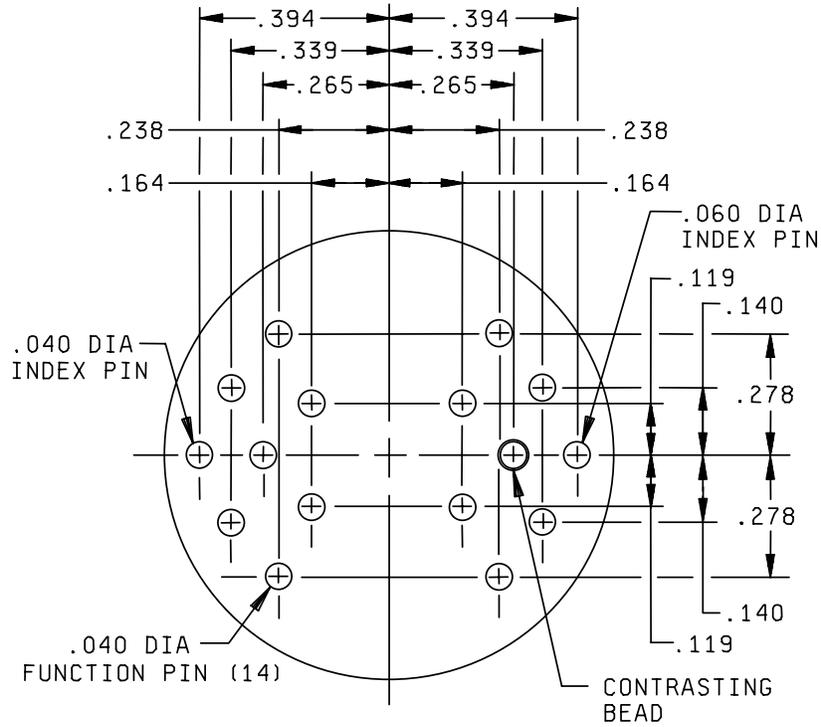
Relay - solder lug configuration (M5757/7-001) - Continued.
